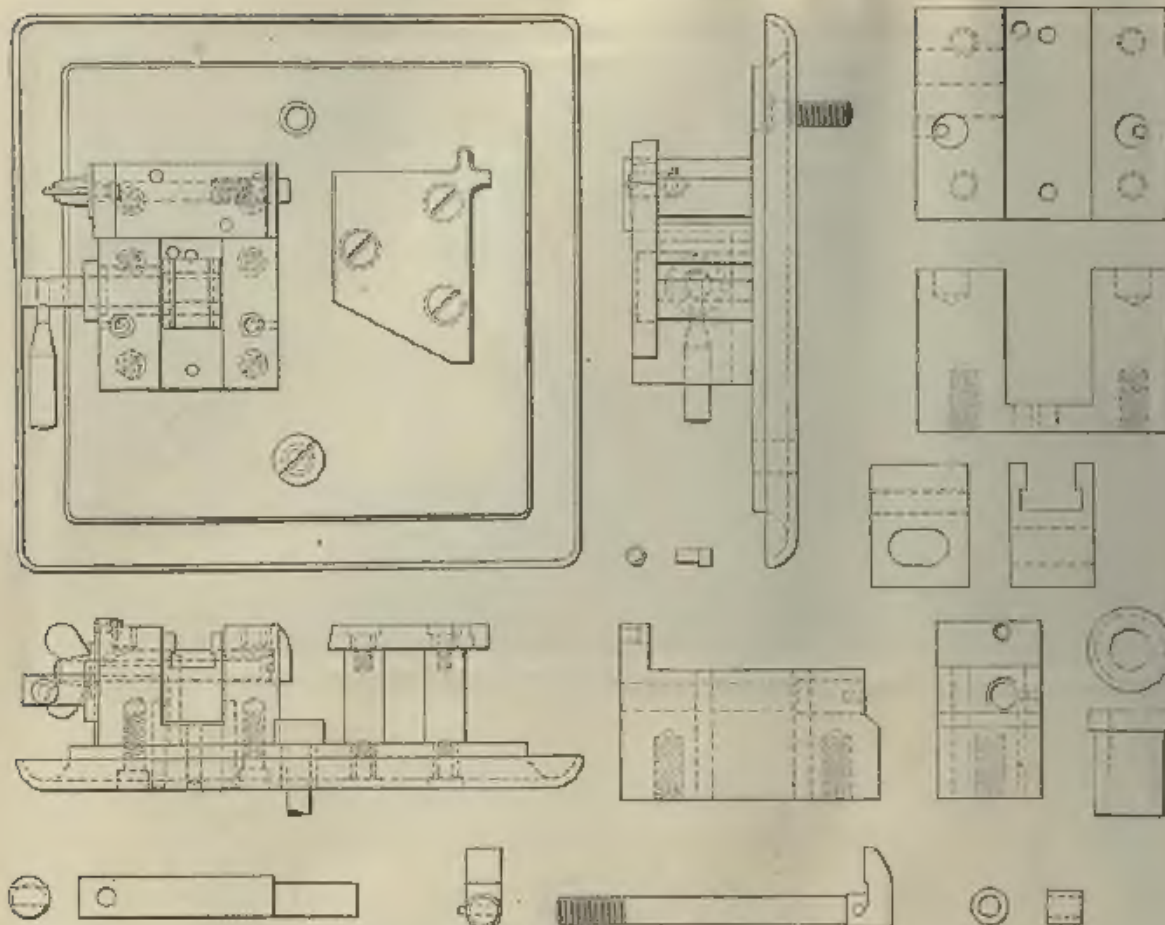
FIXTURE FOR PROFILING LOCKING LUG
